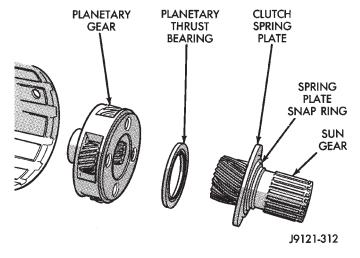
Removing Sun Gear/Thrust Bearing/Planetary Gear
